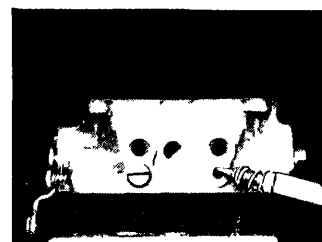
Install idle adjustment screws and springs and idle port plugs. Back out idle adjusting screws to specifications
